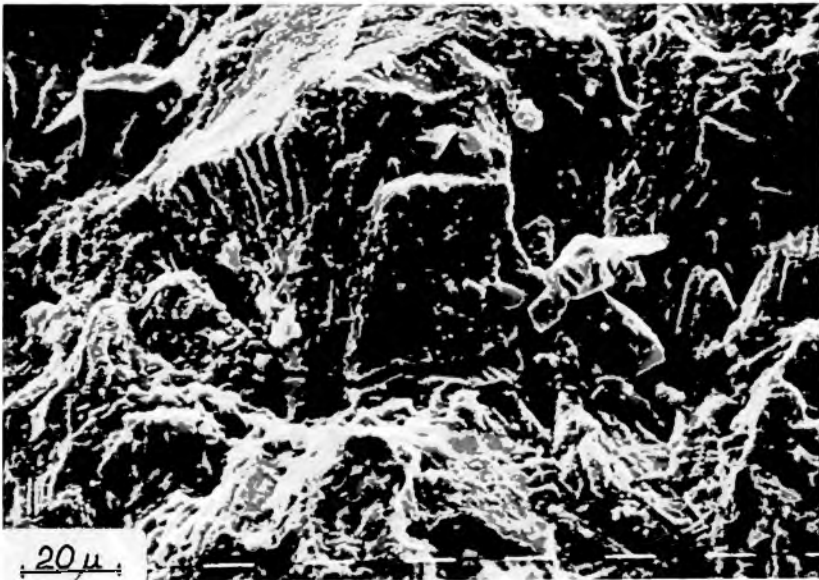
DIN 1.4550: brittle transgranular type of fracture surface crack as produced by in-service failure.
